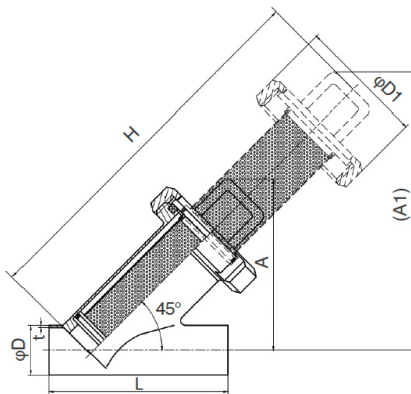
W2000 SS Strainer - DIN Welding
